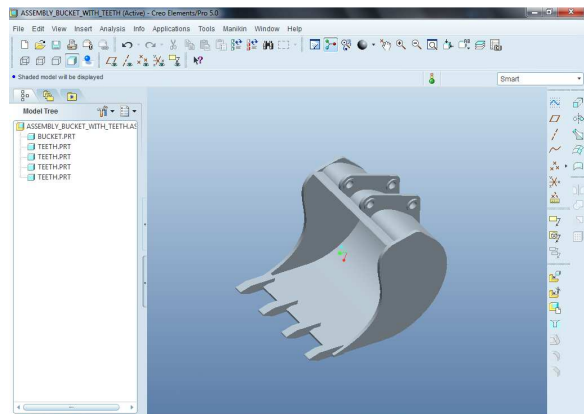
Assembly of an Existing excavator bucket in Pro-e software
